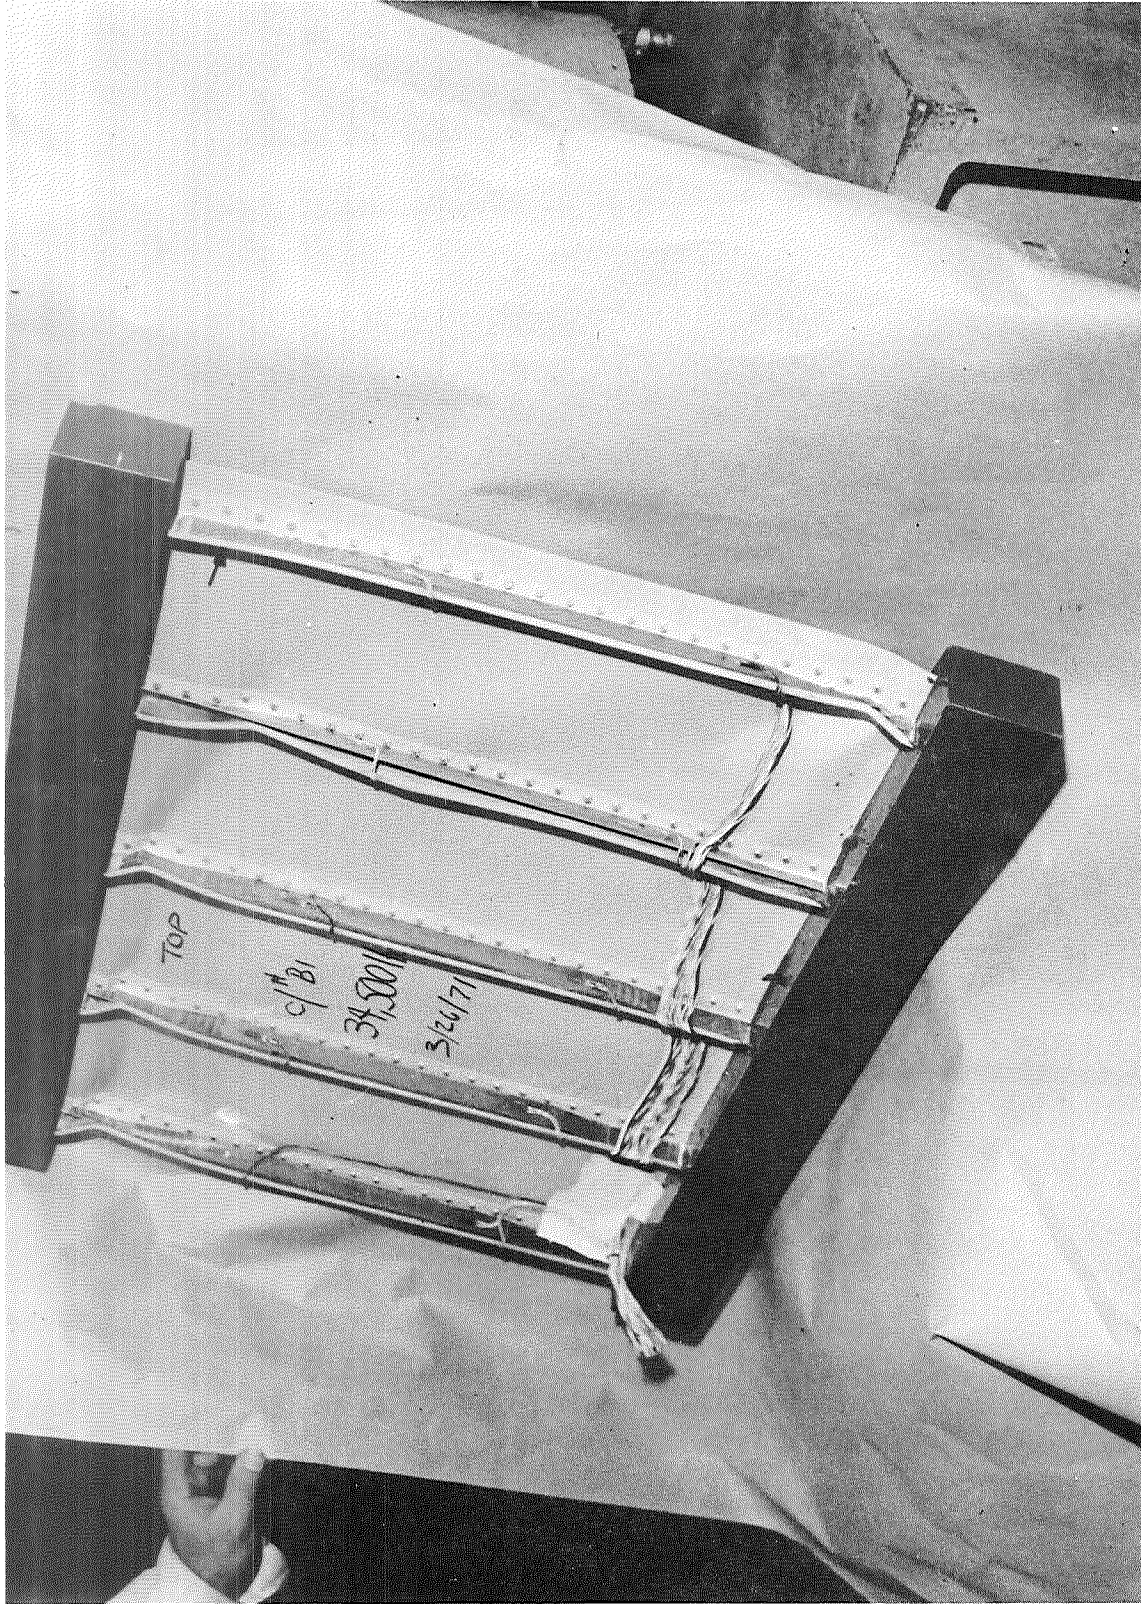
COMPRESSION FAILURE OF BORON/EPOXY REINFORCED STRINGER TEST PANEL.
